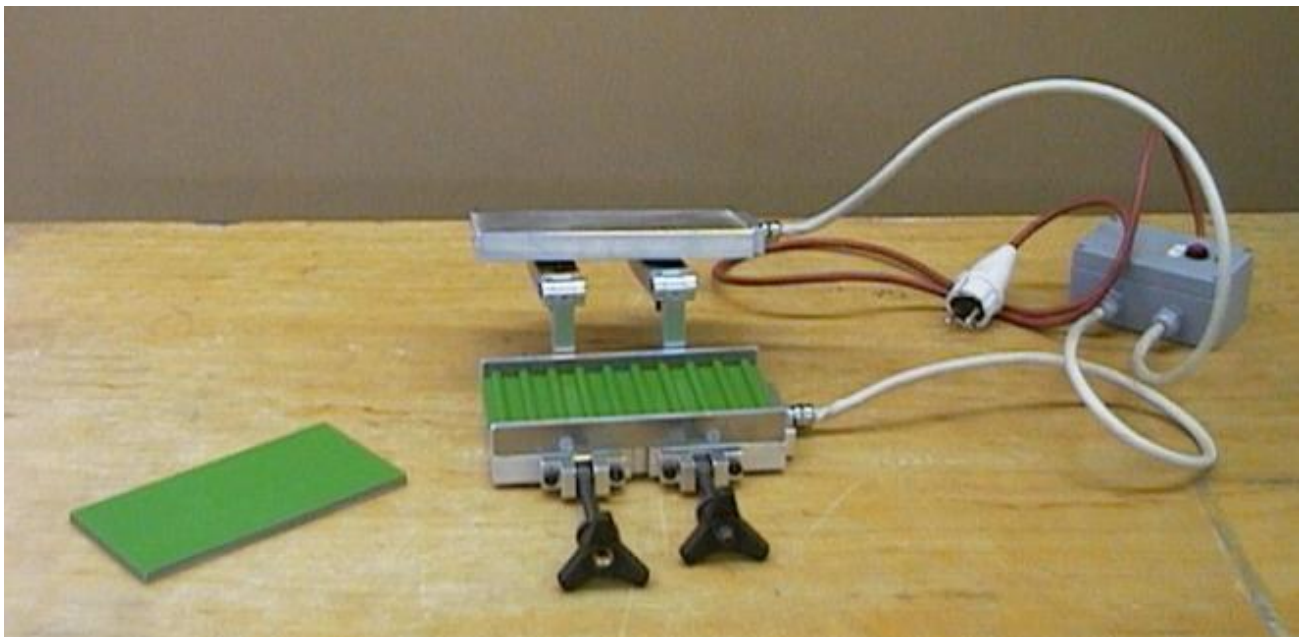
Place the toothed plate with flanges on top of the base plate.
